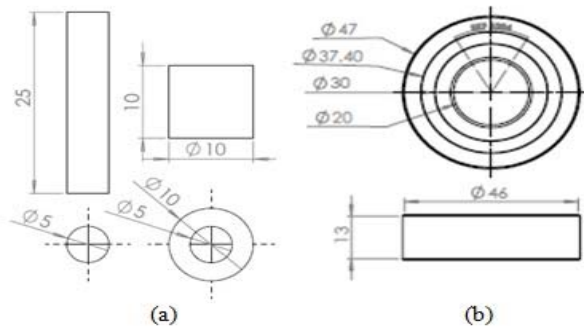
(a) Design internal and external bearing of 12S-14P OR-HEFSM (b) Design ball bearing of 12S-14P OR-HEFSM (All unit in mm).
